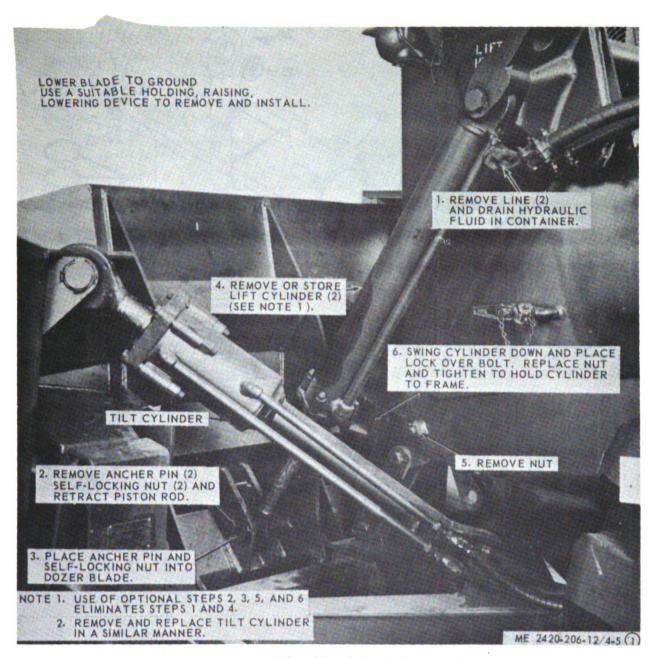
Bulldozer lift and tilt cylinder, removal, disassembly, reassembly, and installation (sheet 1 of 3).
